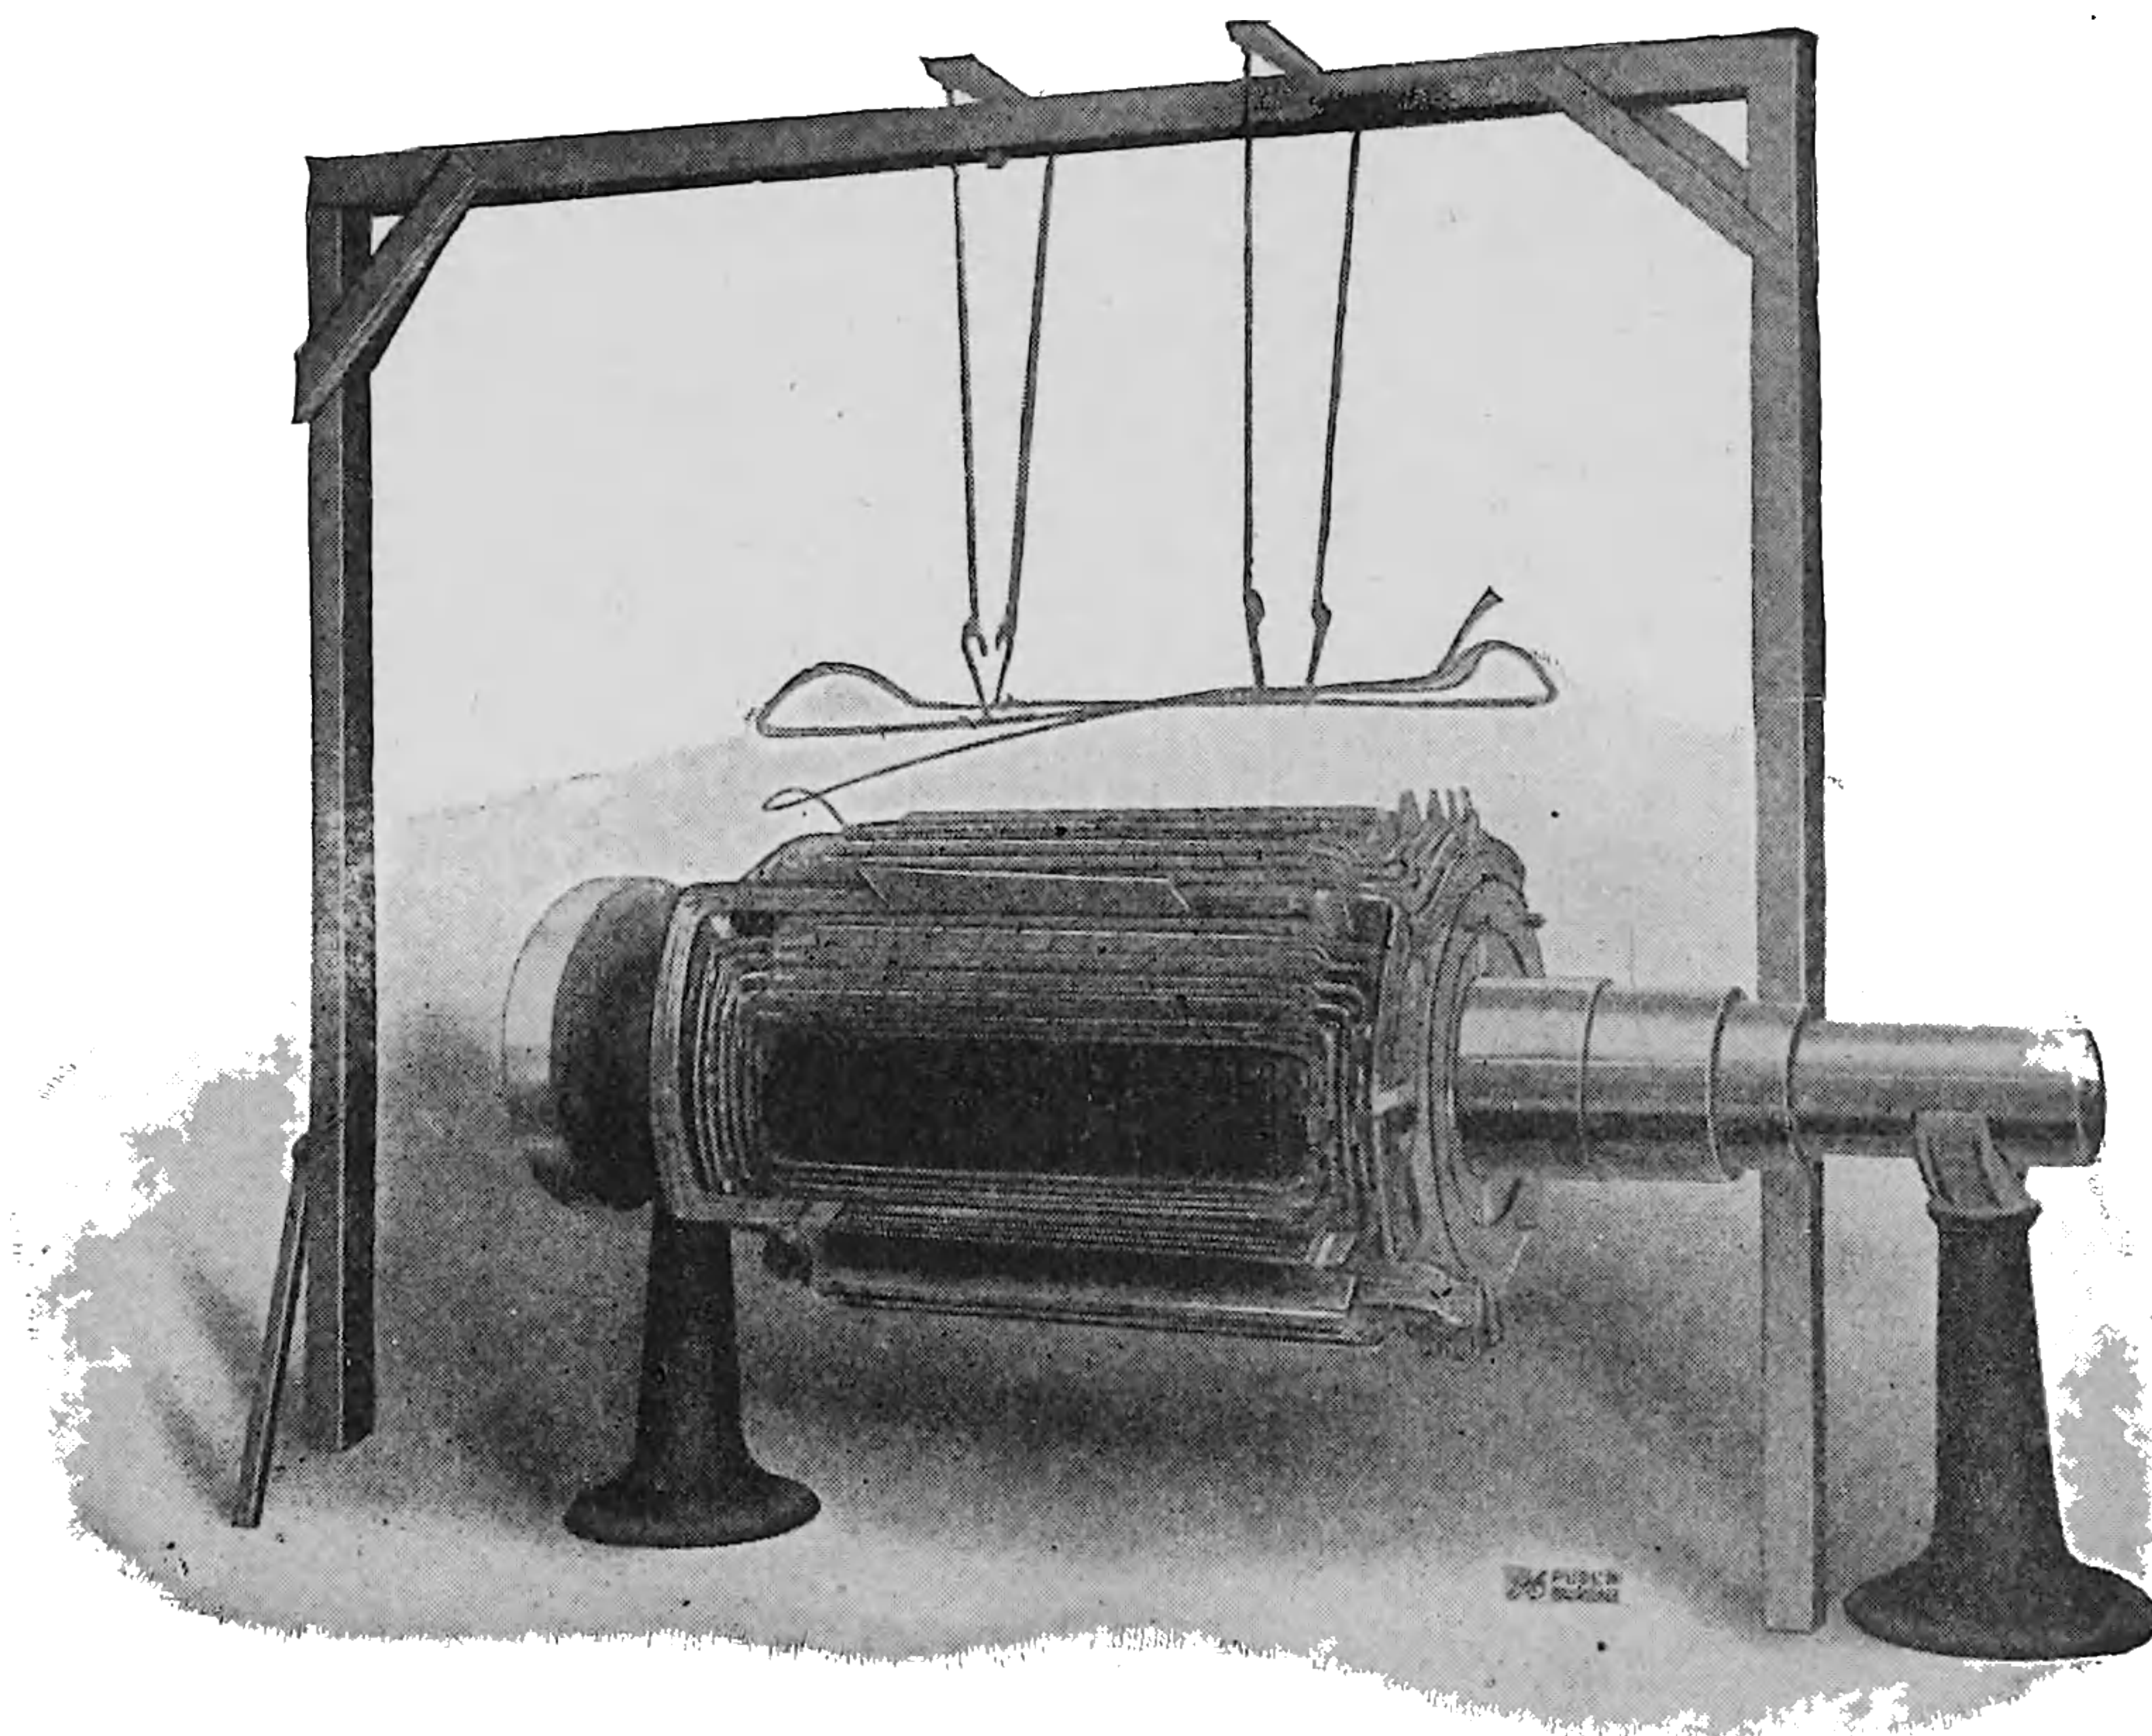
Revolving Field of G. E. Turboalternator with Coils in Process of Assembly.
